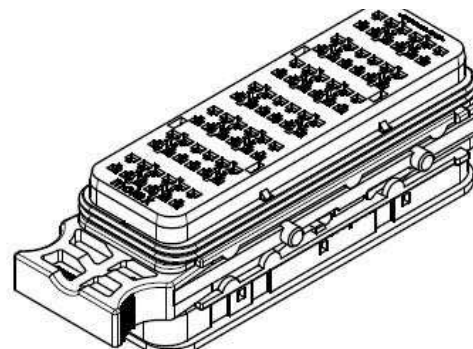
SRC Female 84 Pin Receptacle Housing Assembly
